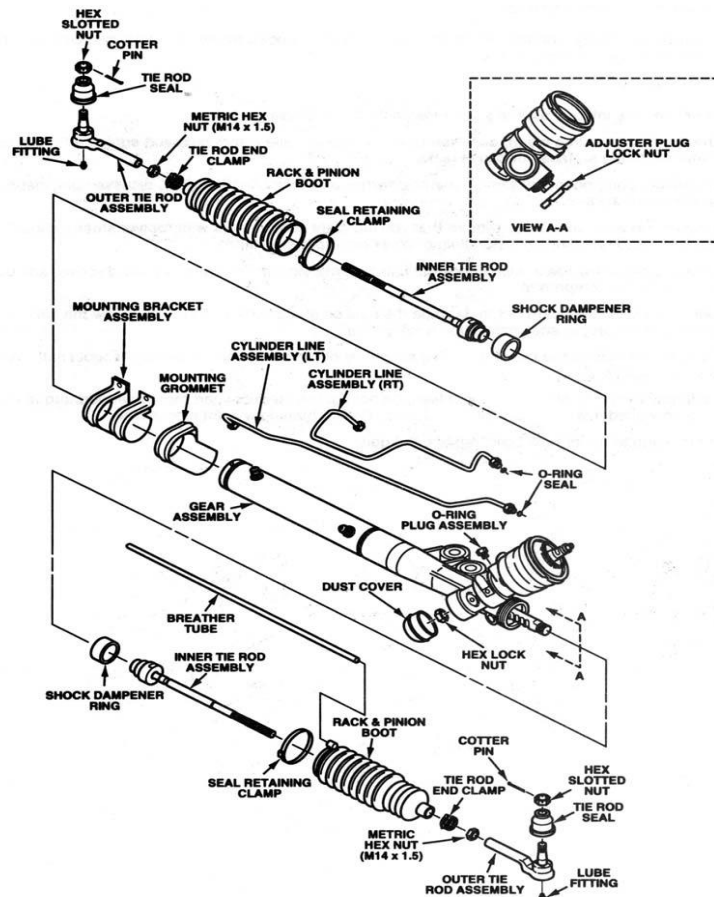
Exploded view of a typical rack-and-pinion system [15]
